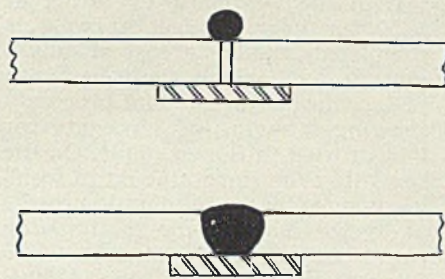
This type of butt weld with filler metal added is utilized for automatic welding of tanks, range boilers, pipes and similar items
